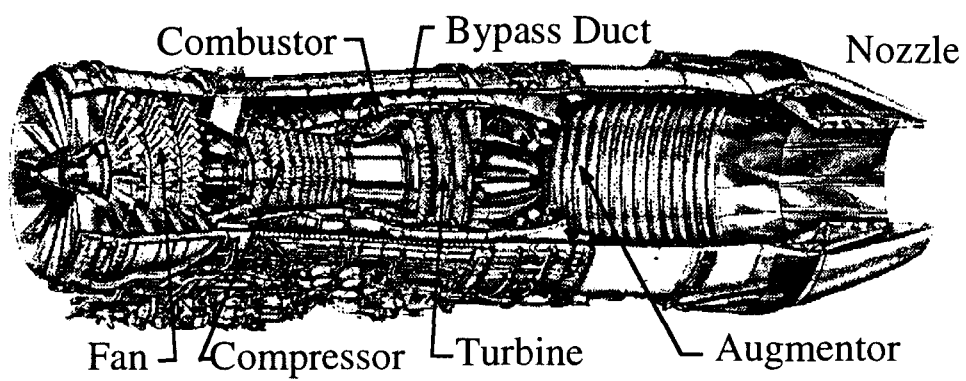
Cutaway View of a Gas Turbine Engine Showing its Various Components.
